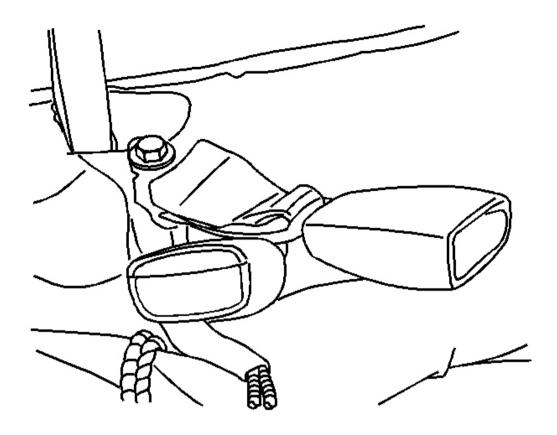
Seat Belt Buckle & Seat Frame Courtesy of GENERAL MOTORS CORP.
